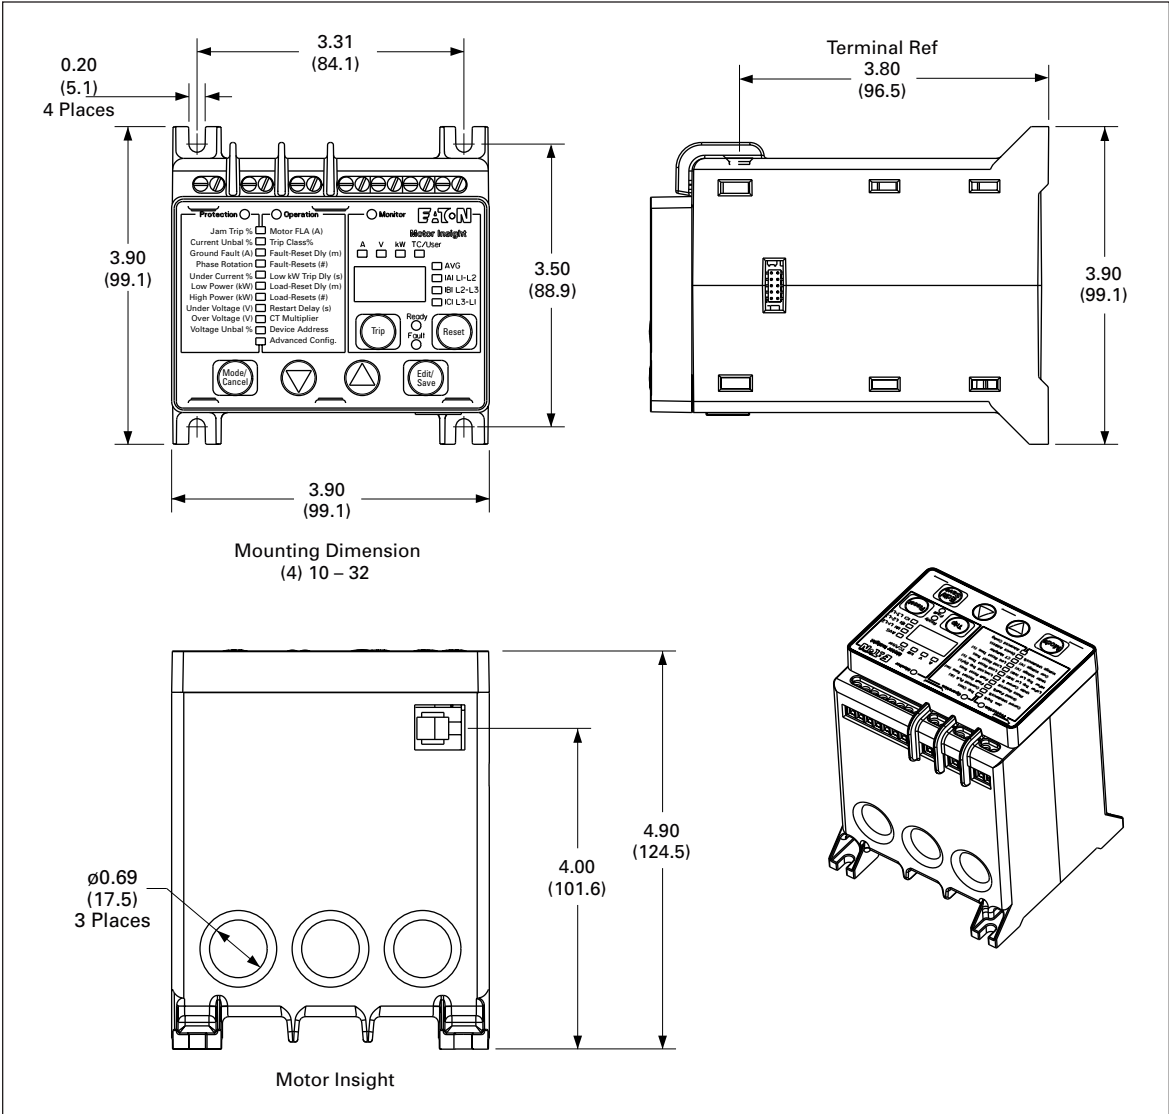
Motor Insight Overload (B10-9112) Dimensions
